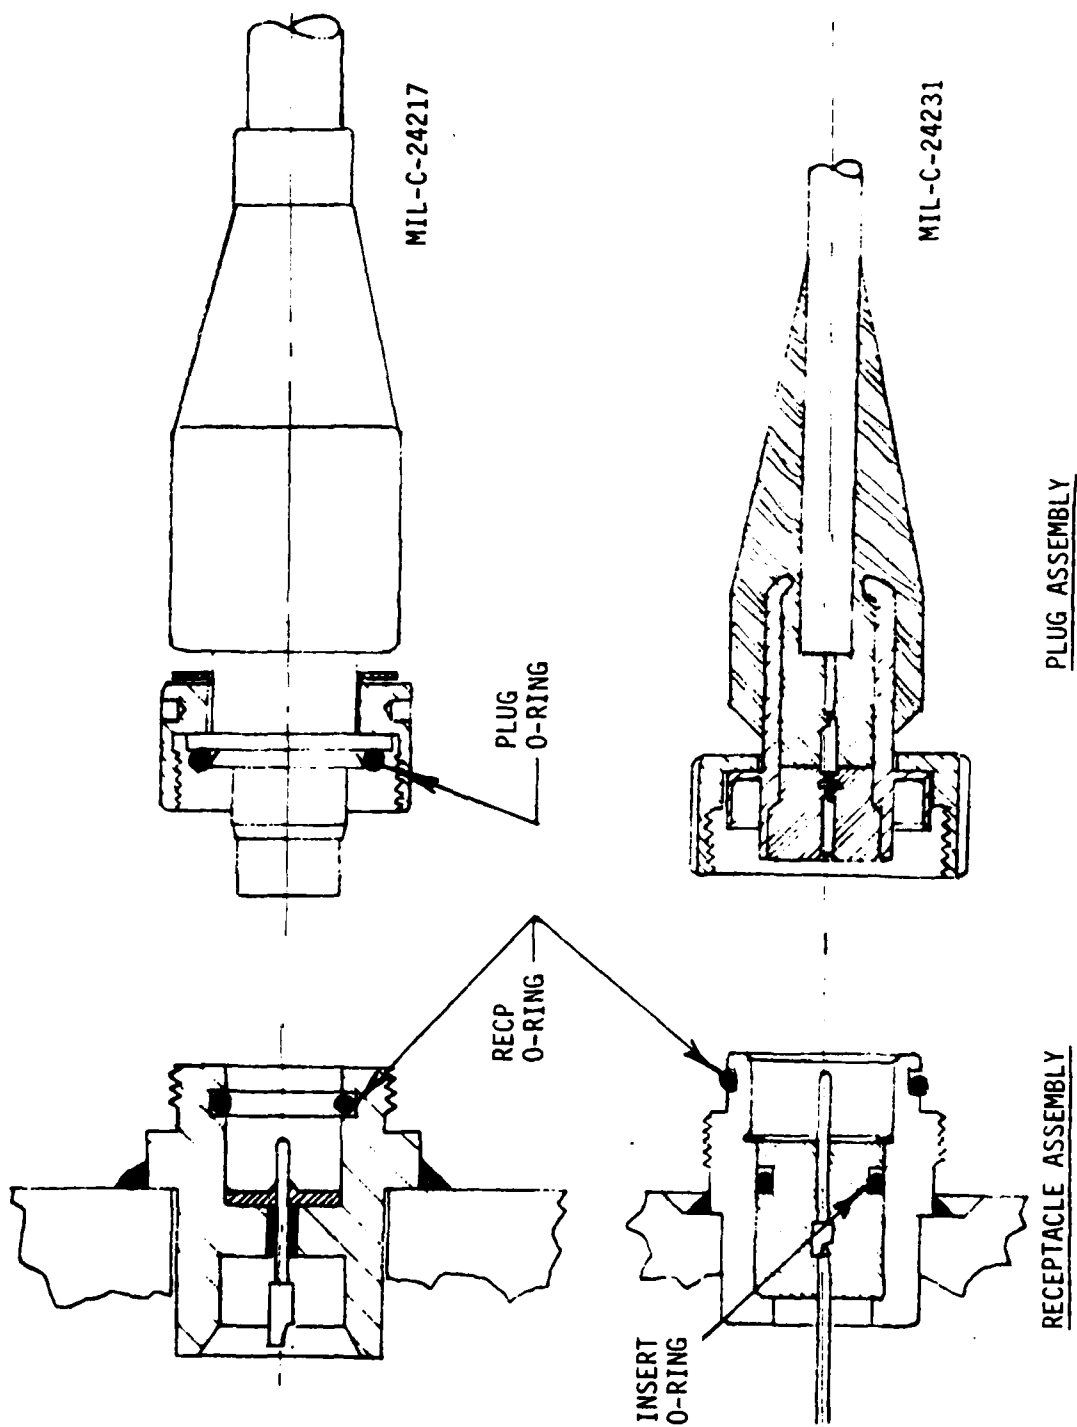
PLUG AND RECEPTACLE ASSEMBLY O-RING LOCATIONS
